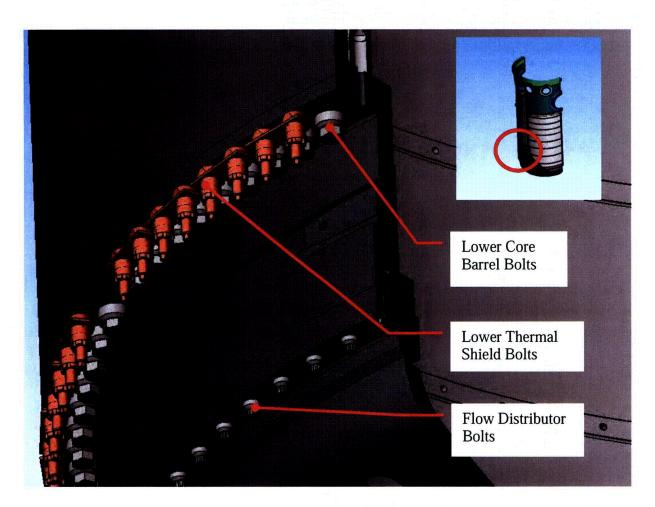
Typical lower thermal shield bolts, lower core barrel bolts, and flow distributor bolts for the B&W-designed PWRs
